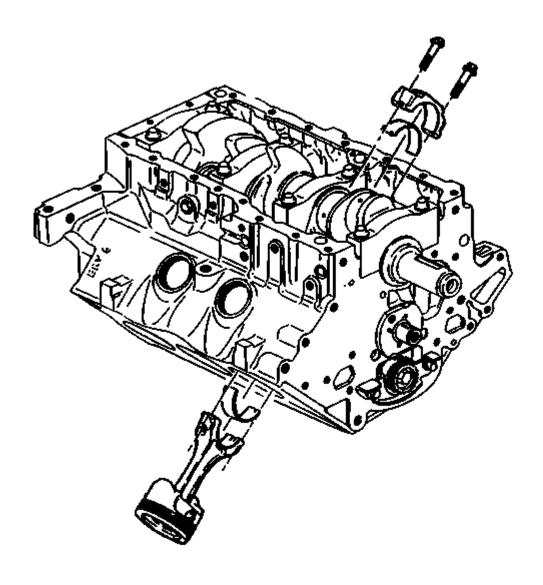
Connecting Rod Bolts & Cap Courtesy of GENERAL MOTORS CORP.
